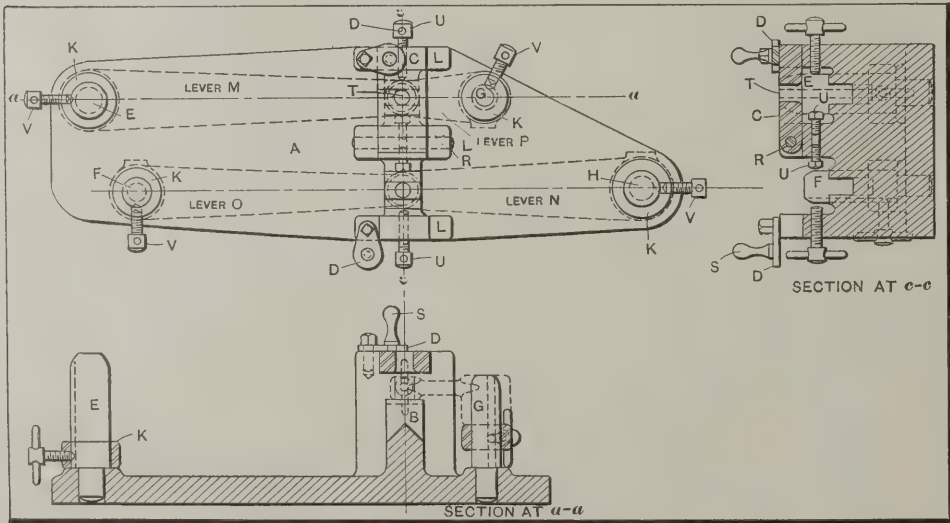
Plan and Section of Drill Jig for Levers in Fig. 1
